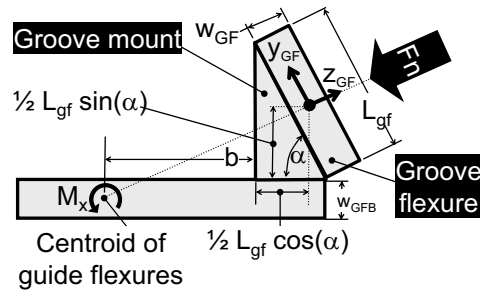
Center of stiffness model for the assembly of the guiding flexure bearing, groove mount, and groove flexure
